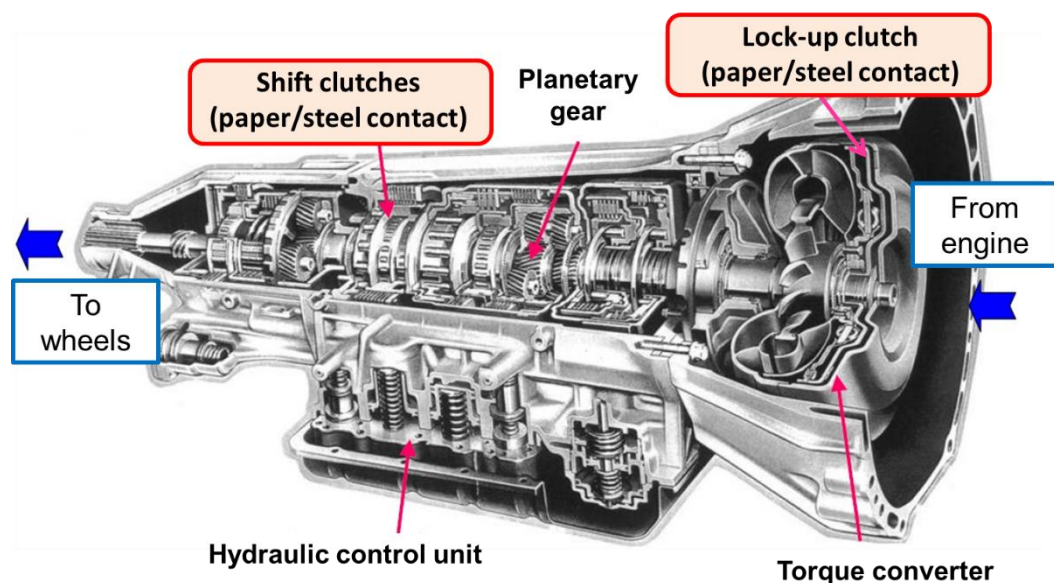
Schematic layout of the FR (Front engine Rear drive) AT
